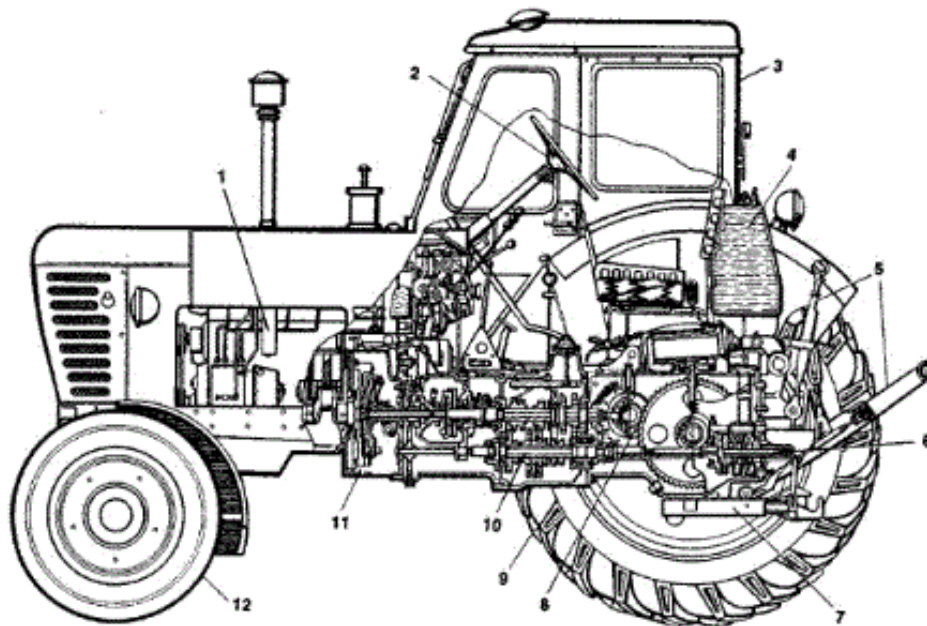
Wheel-type tractor: (1) engine, (2) steering wheel, (3) cab, (4) fuel tank, (5) levers of toolbar assembly, (6) power takeoff shaft, (7) hitch, (8) main drive, (9) driving wheel, (10) gear box, (11) clutch, (12) front (steerable) wheel
